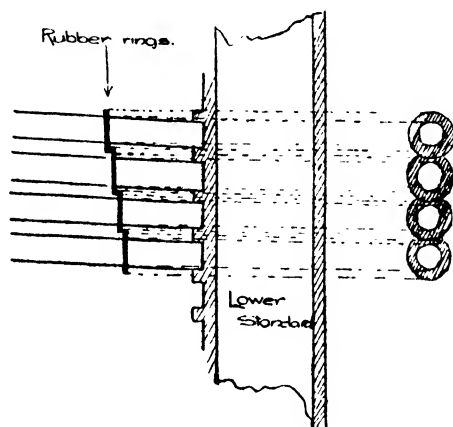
To show the Use of Rubber Rings in preventing Cooling Water reaching the Joints where the Glass Tubes enter the Standard.
